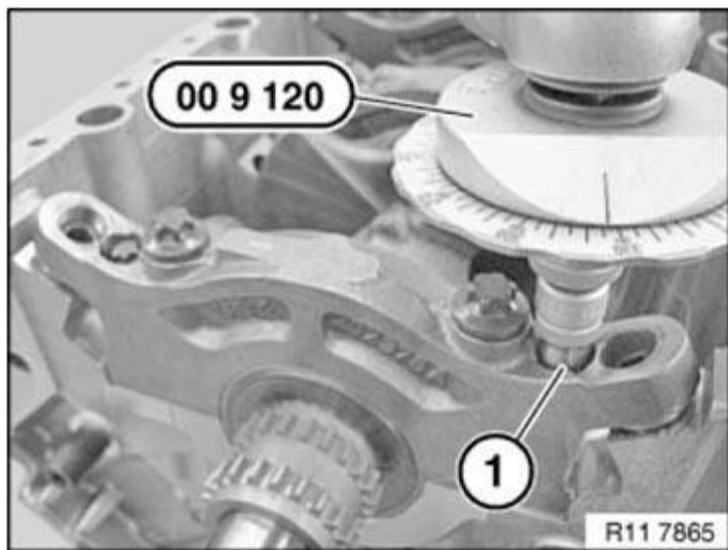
Securing Collar Bolt With Special Tool 00 9 120
